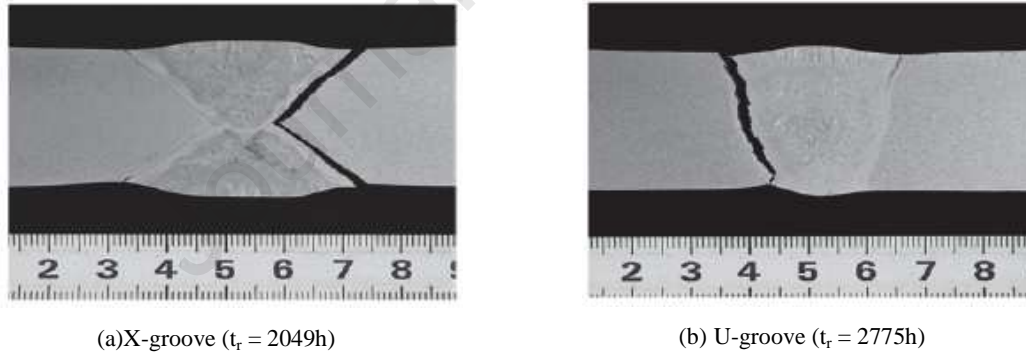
Macrostructures after failure of large uniaxial cross weld specimens [11]
